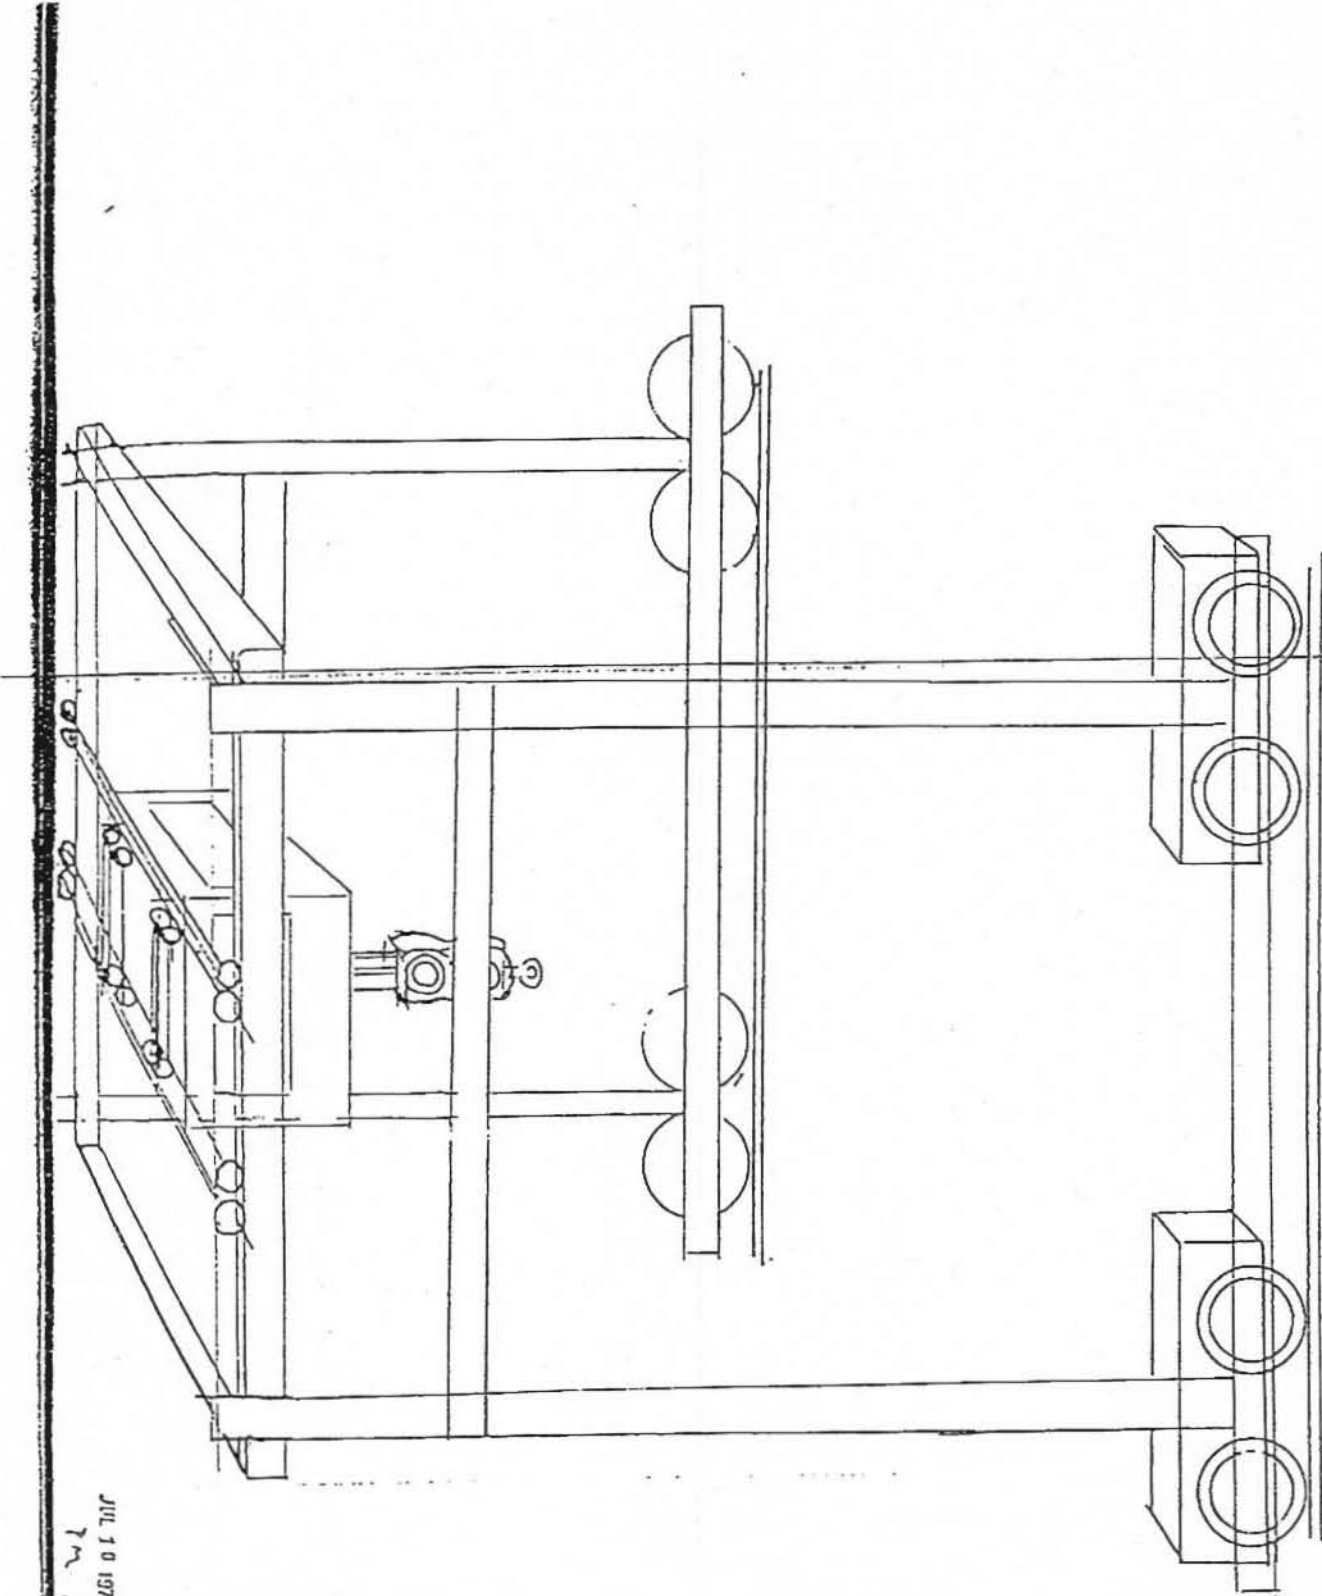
SUBJECT EFFORT AT BUILDING LAYOUT
